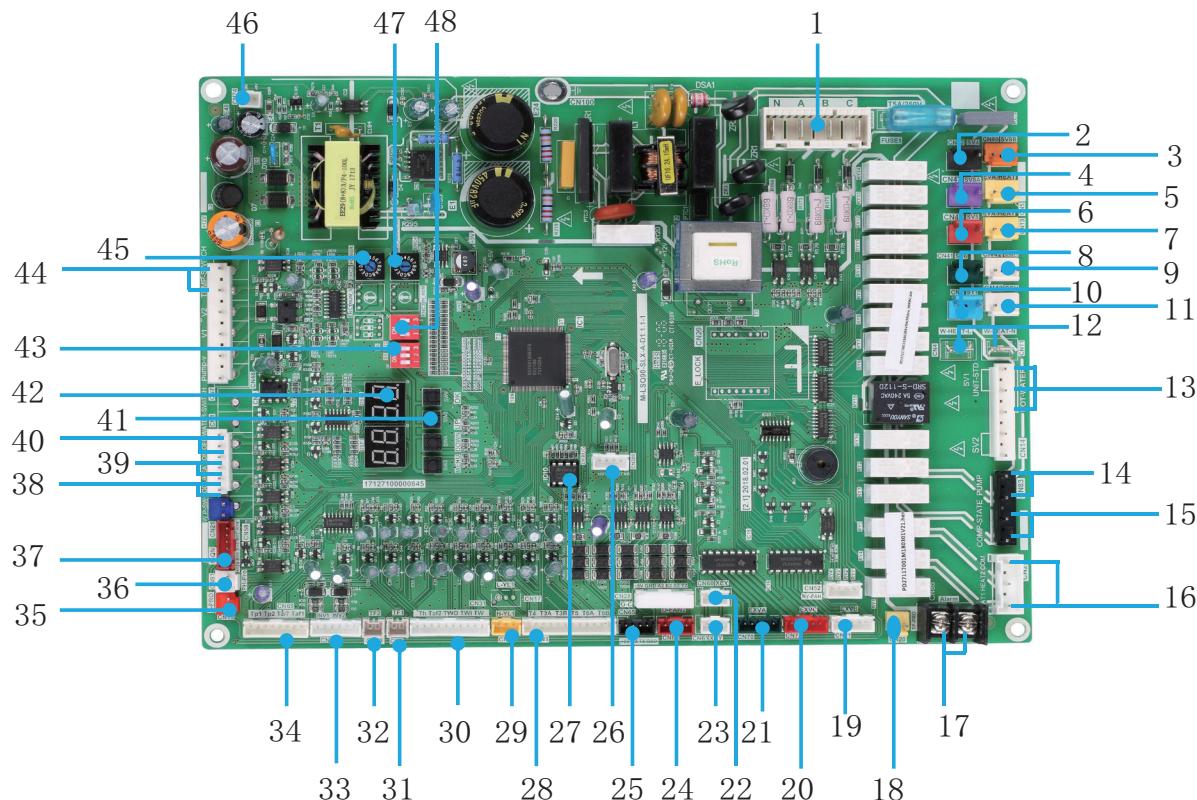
Main PCB of KEM-90 DNS3 KH
